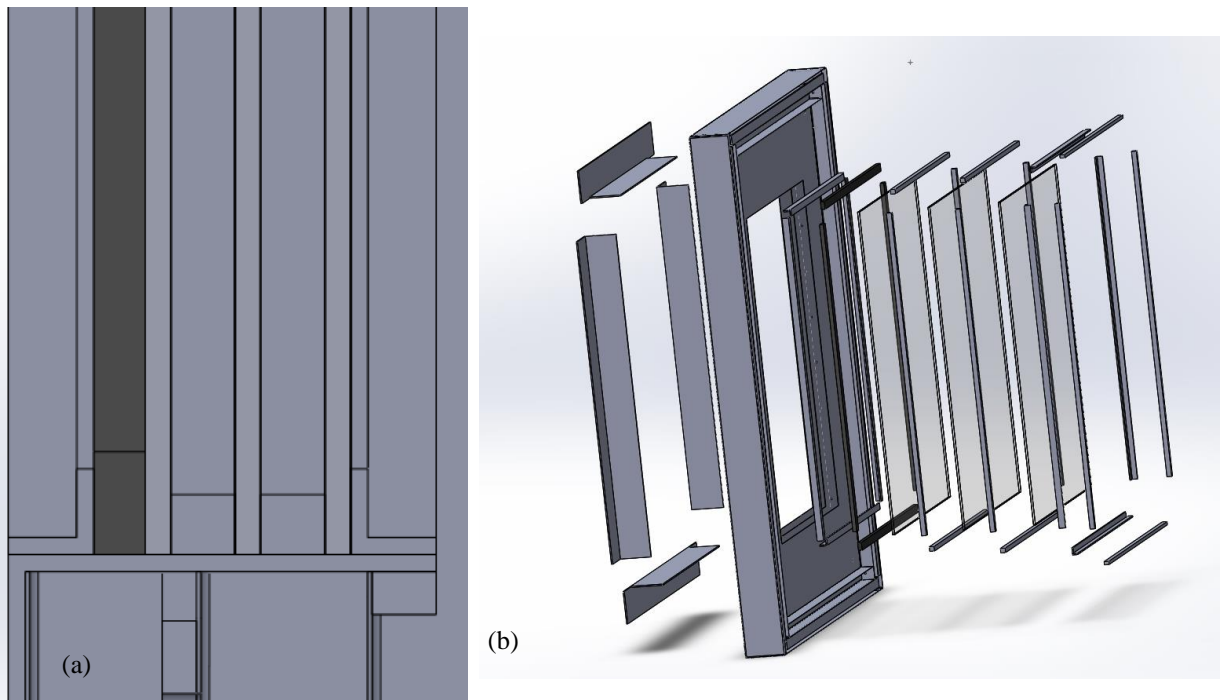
(a) Section view of the window; (b) Exploded view of the window.
